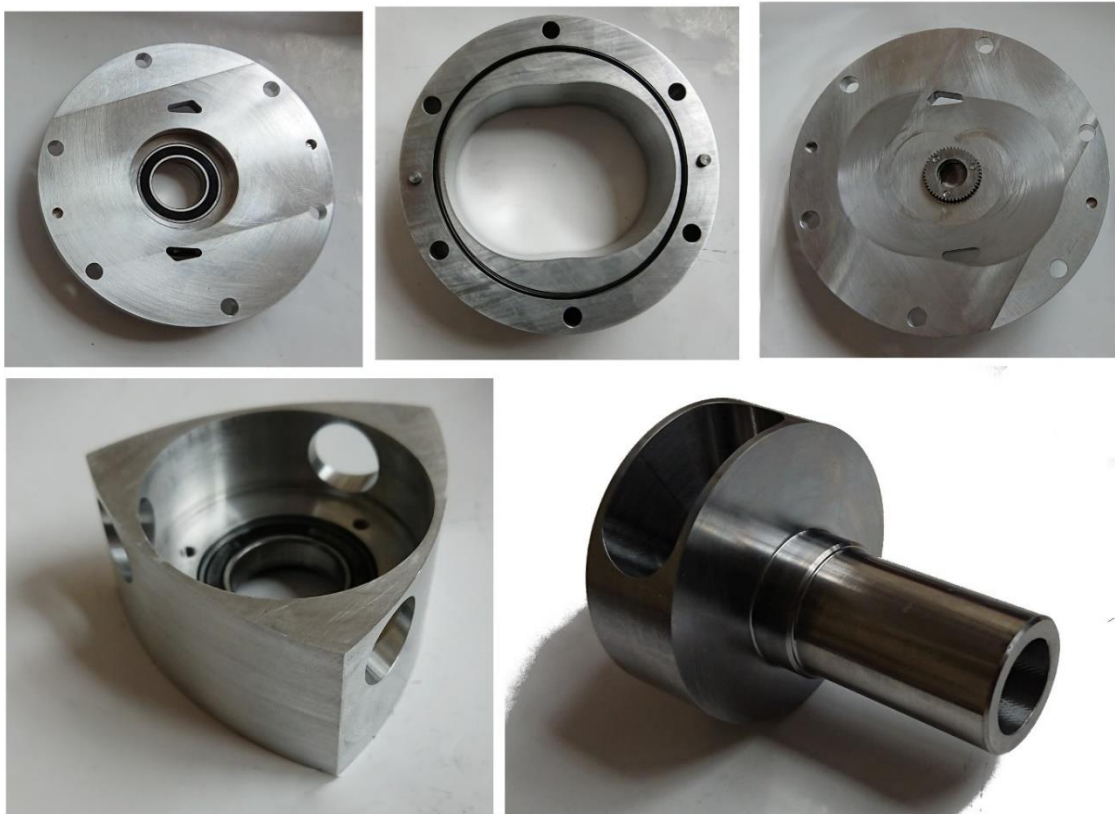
Metal 1st prototype parts, Steel (Internal shaft, bottom-right) and Aluminium 7075 (the rest)
